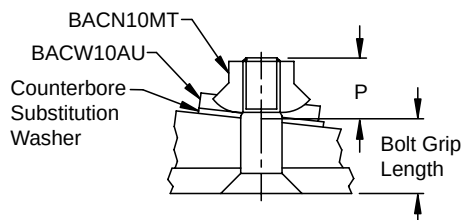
THREAD PROTRUSION ON SLOPING SURFACE
